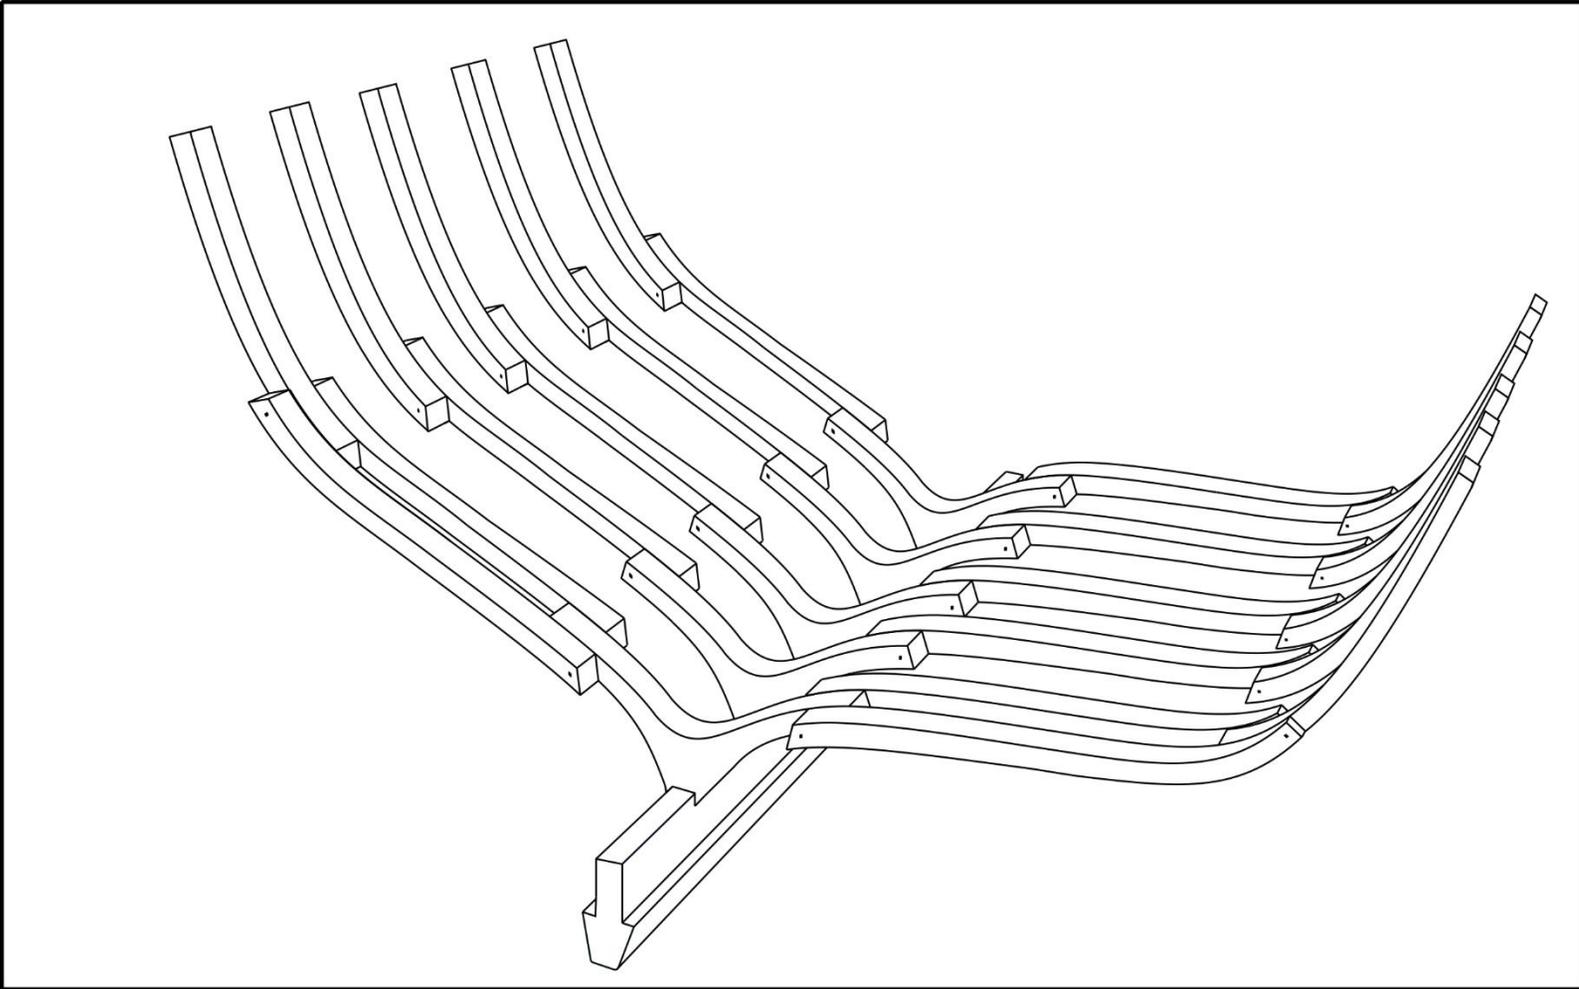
Lapstrake construction with the floor-timbers and futtocks installed after the lower hull was complete. (Author's drawing)
